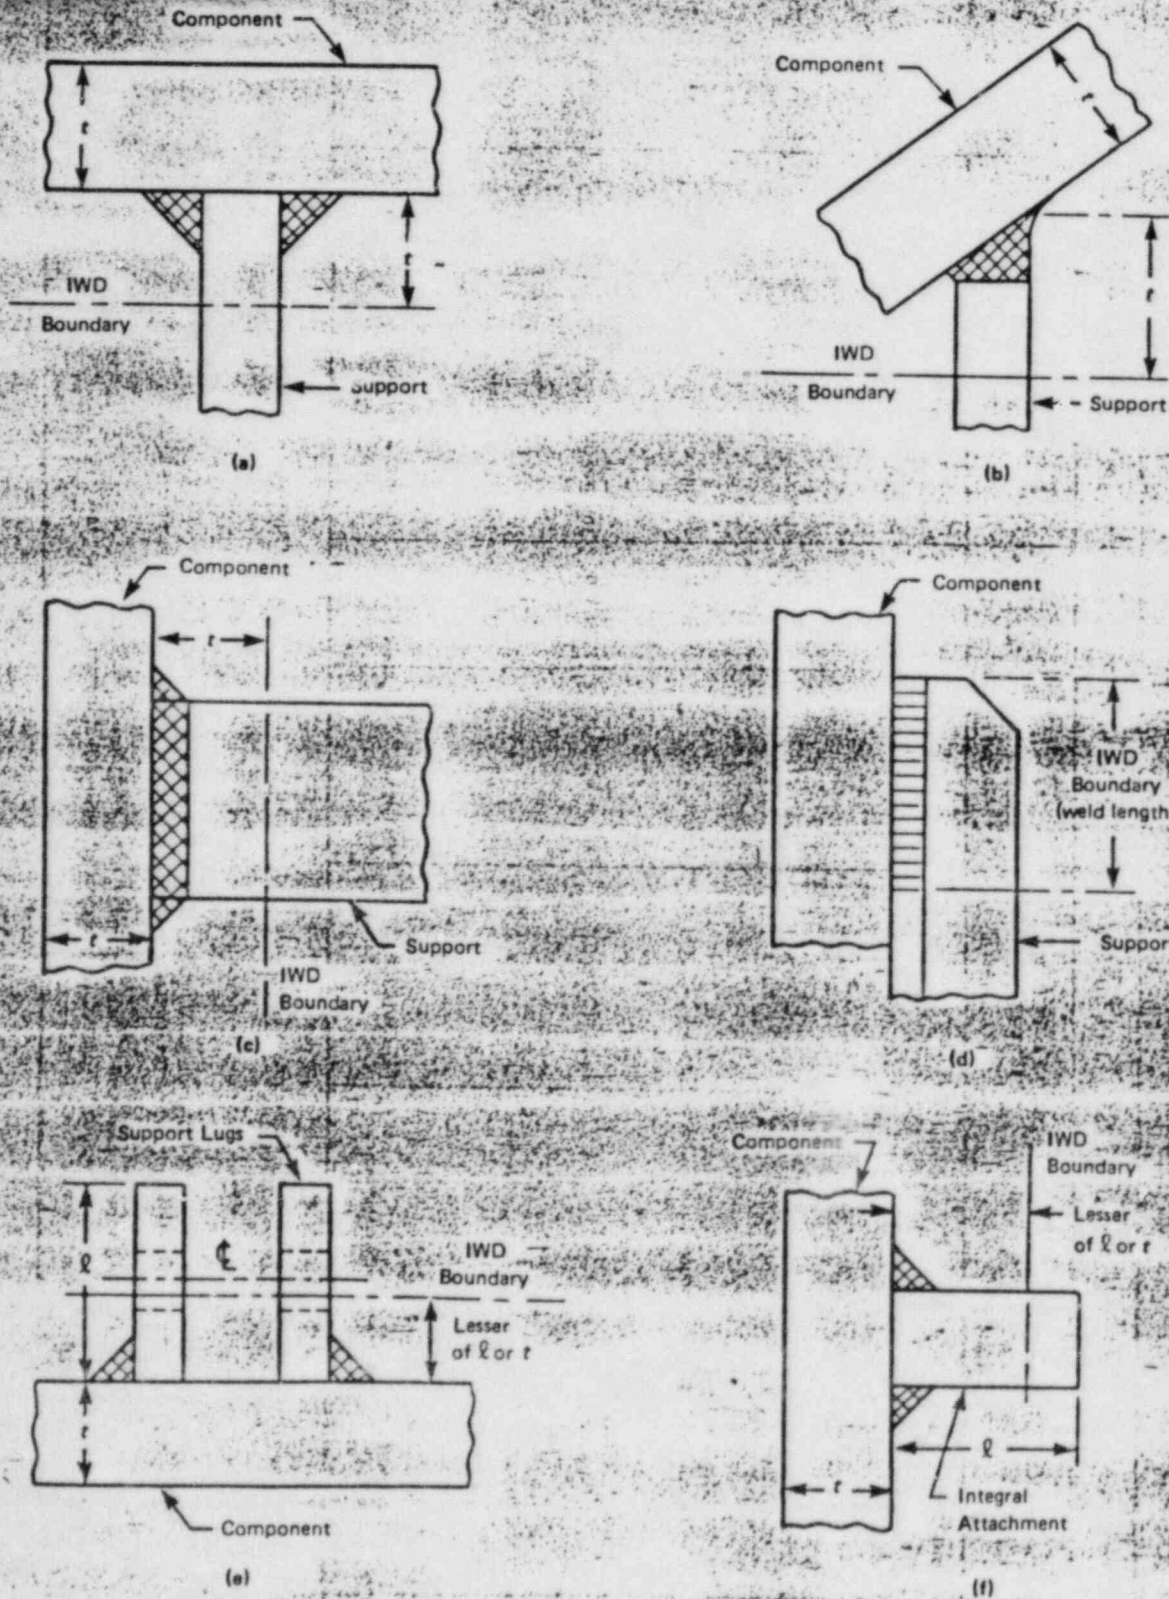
INTEGRAL ATTACHMENT — COMPONENT SUPPORTS
